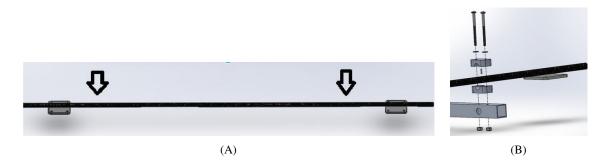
Carbon fiber tubes, (A), are placed between the top and bottom pieces of the clamp assembly, (B). A pin on the clamp's top piece will hold it in a vertical orientation.
